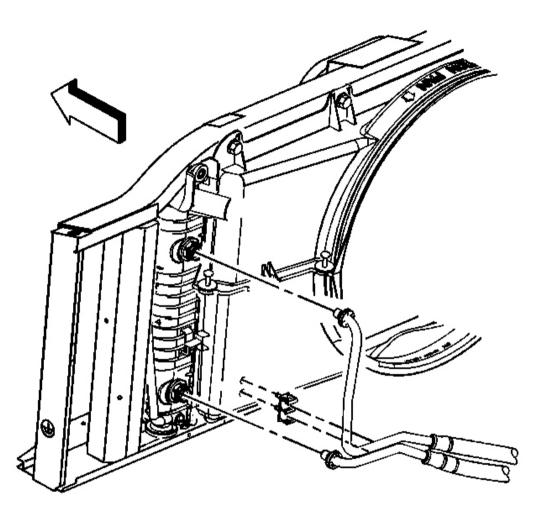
Oil Cooler Hoses Courtesy of GENERAL MOTORS CORP.
